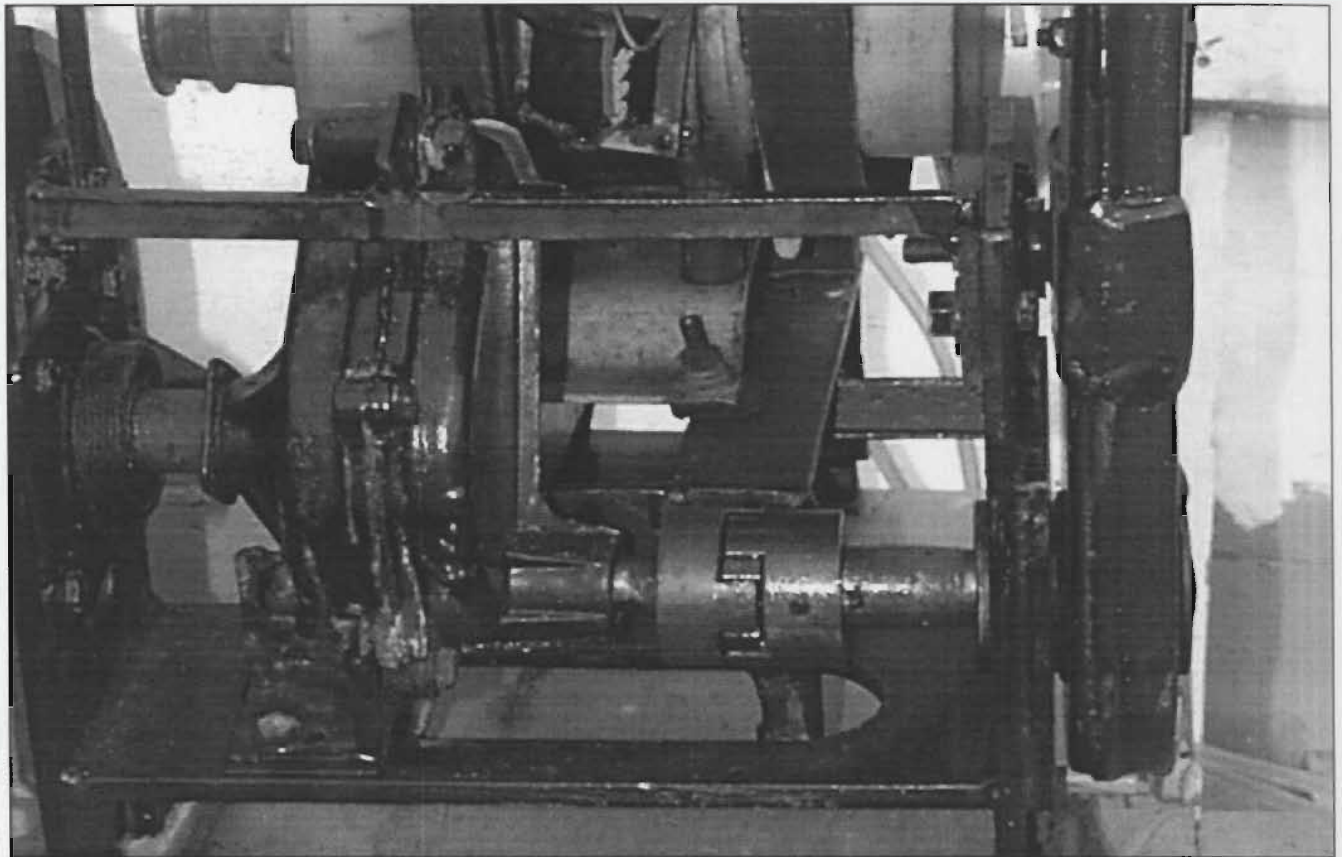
21 Actual installation of the power take-off gears, reducer-oscillator assemblies
